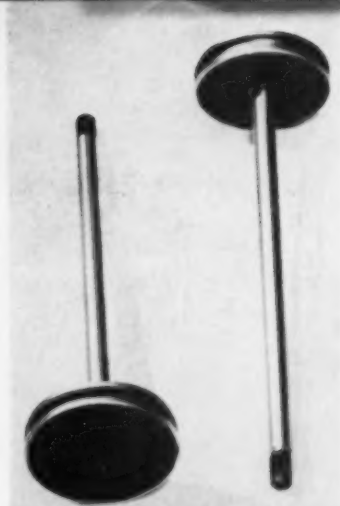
Head of pneumatic piston, once machined and secured to rod with a nut, is now an integral piece. Using 0.750 in. 4130 bar stock, 12 in. of stock is gathered, forged, and machined.
